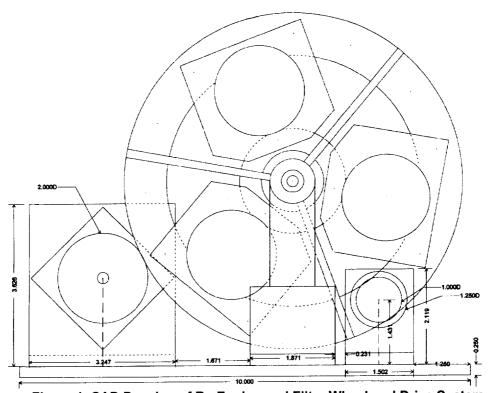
CAD Drawing of Re-Engineered Filter Wheel and Drive System.
